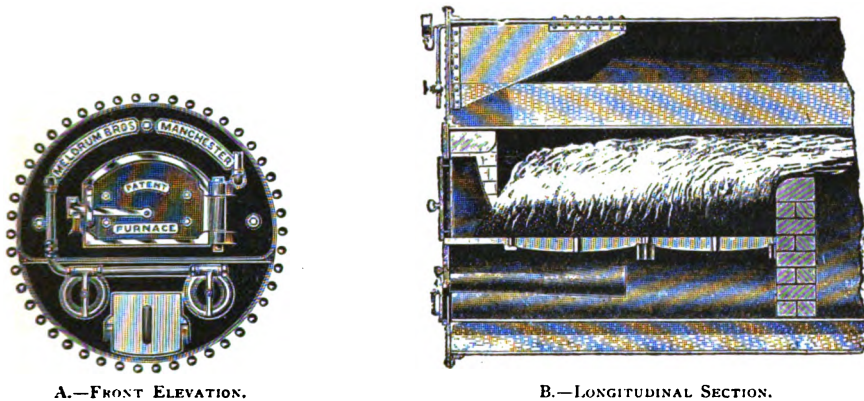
THE MELDRUM FURNACE APPLIED TO A CORNISH BOILER.
